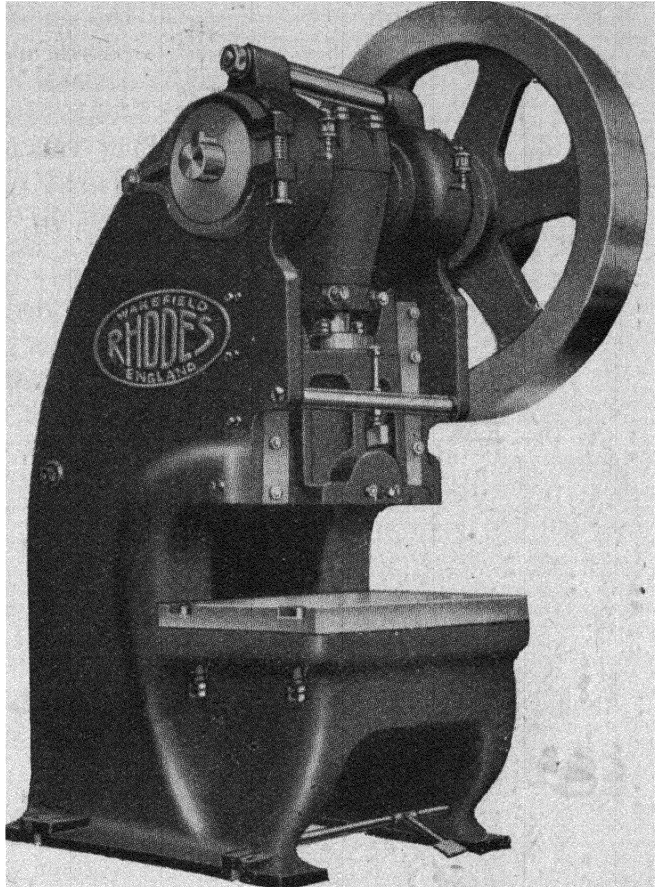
A TYPICAL OPEN-FRONTED PRESS
